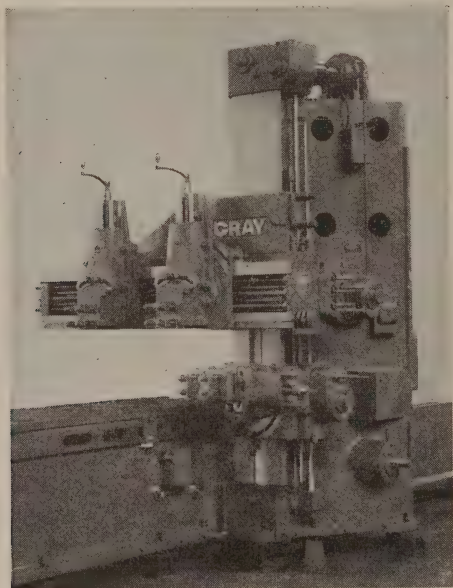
Open-side planer with one vertical, and two horizontal toolheads.
